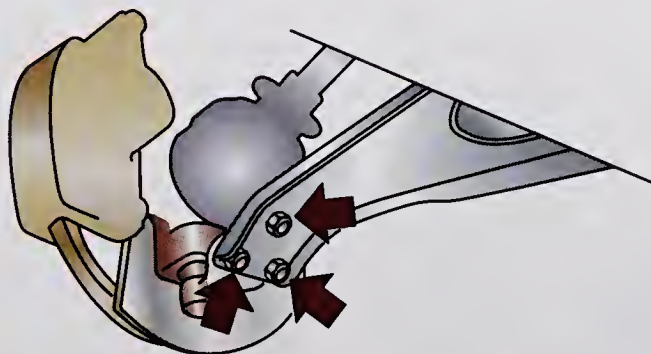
Installing the ball joint retaining bolts and nuts in the lower control arm.
